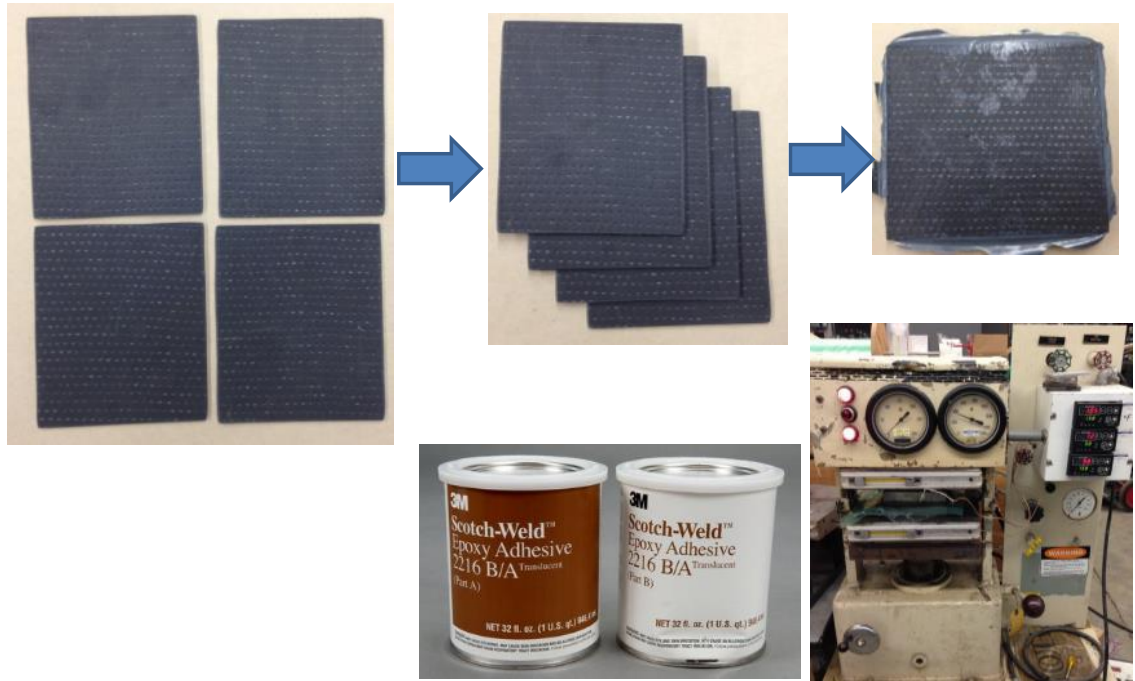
Pieces of customized Carbon Fiber reinforced composites are stacked and bonded together using Scotch-Weld epoxy under 2 MPa pressure at 66°C.
